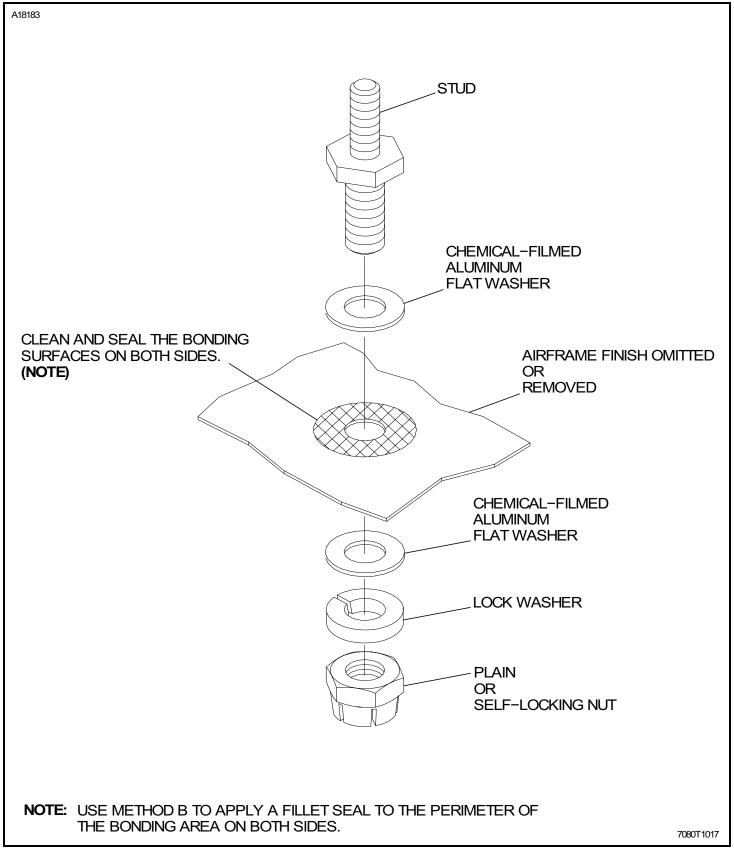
Sheet 1 : Electrical Bonding - Electrical and Avionic Ground Stud Installation
